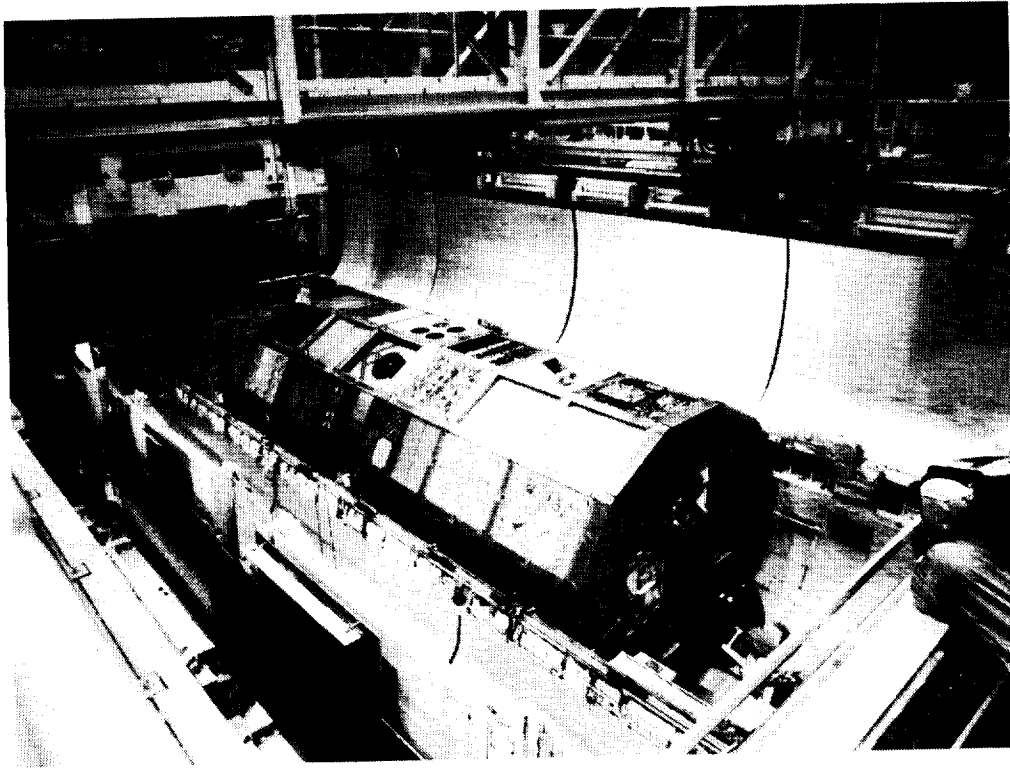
Payload bay doors being opened in Orbiter Processing Facility. (Photo L- 90-01079)
